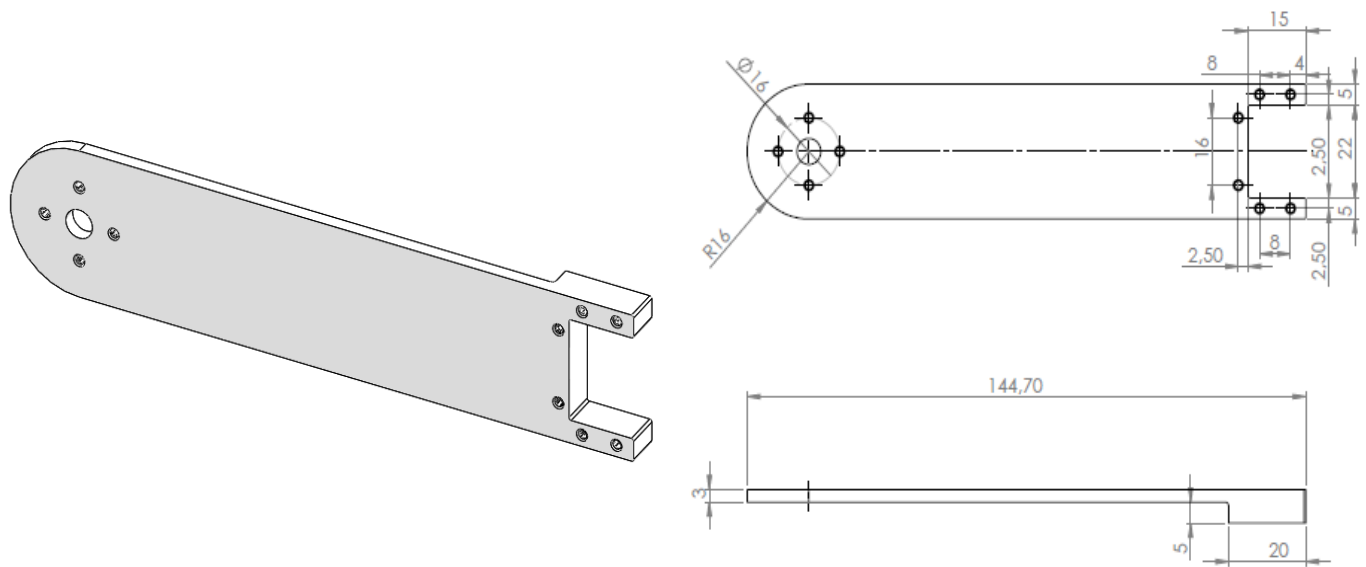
Technical Drawing and Trimetric Views of the Second Arm Link
